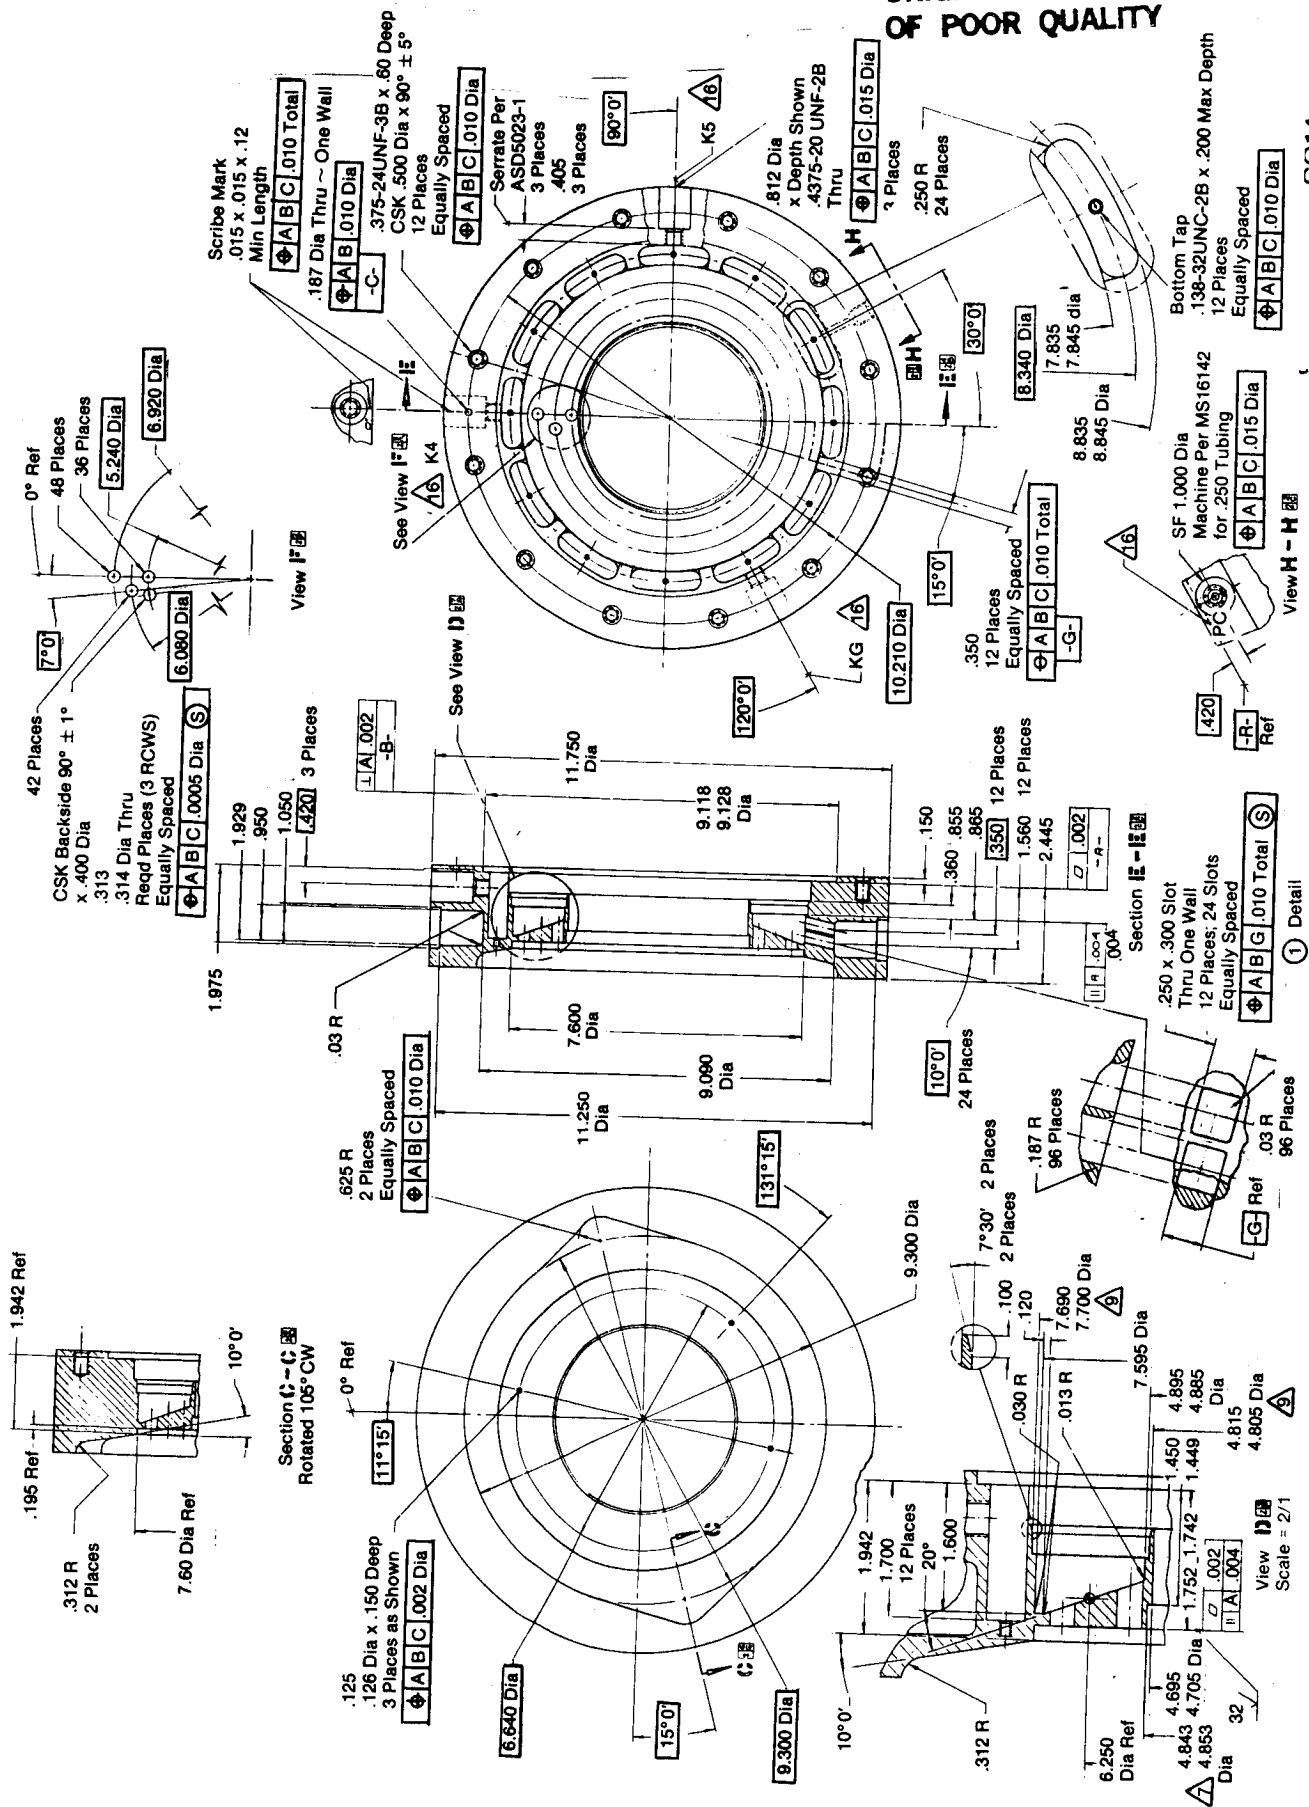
Dual Throat Thruster Secondary Injector Assembly
